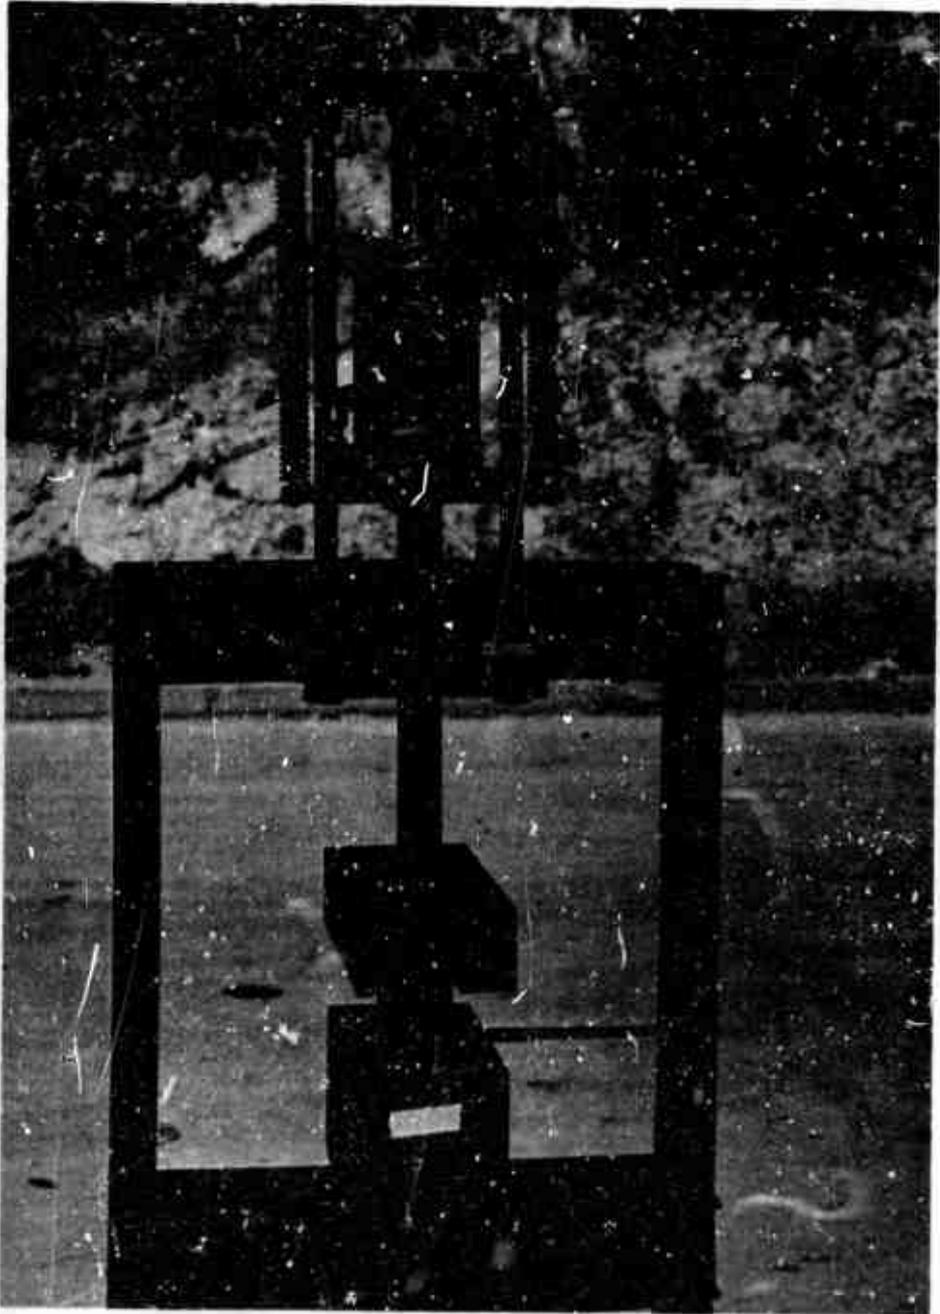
Press Operated Tooling for Explosive Spot Welding.
